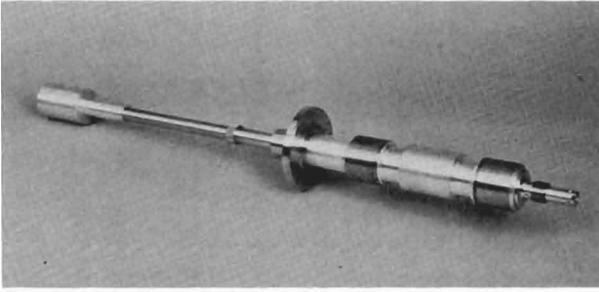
Rotor with two bearing rings for the radial bearing (right), support disk for the axial bearing (center) and payload crucible (left).
